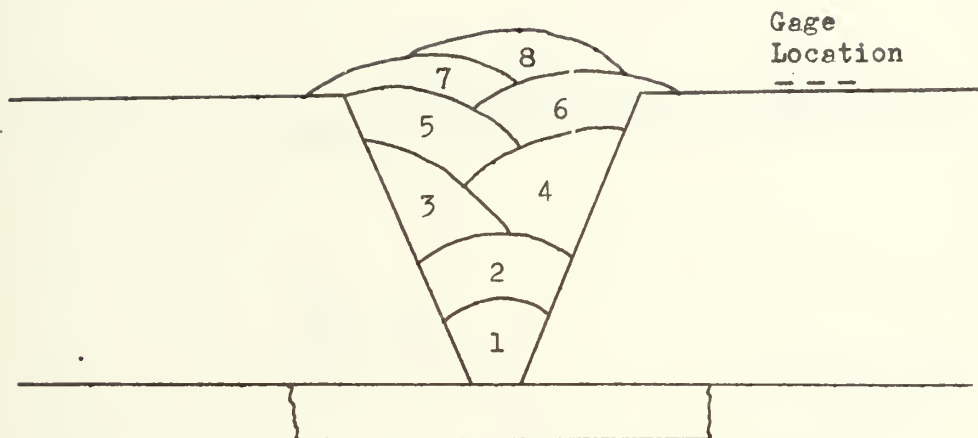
SEQUENCE OF WELD PASSES
